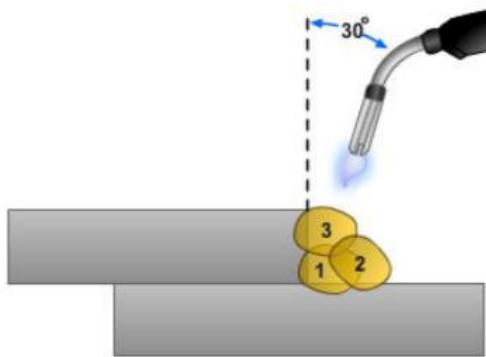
Position of electrode on a lap joint. motion and ensure that each bead penetrates the base metal.
